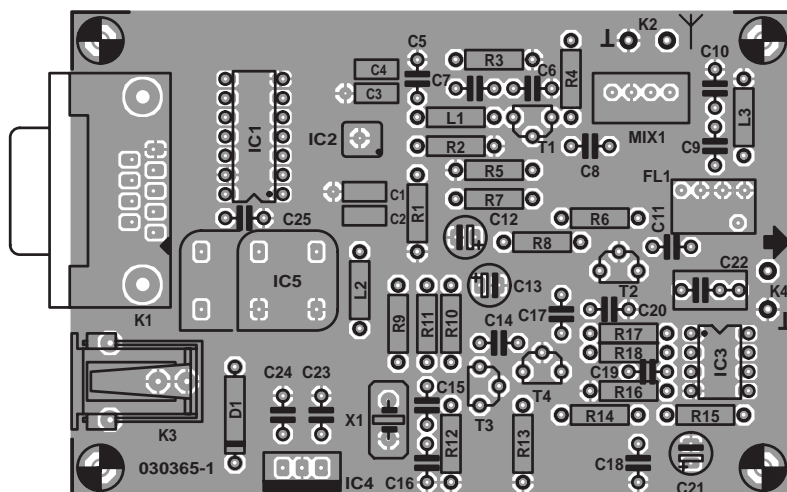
The PCB is double-sided and through-plated. All parts in the RF sections have to be soldered with the shortest possible lead lengths.
